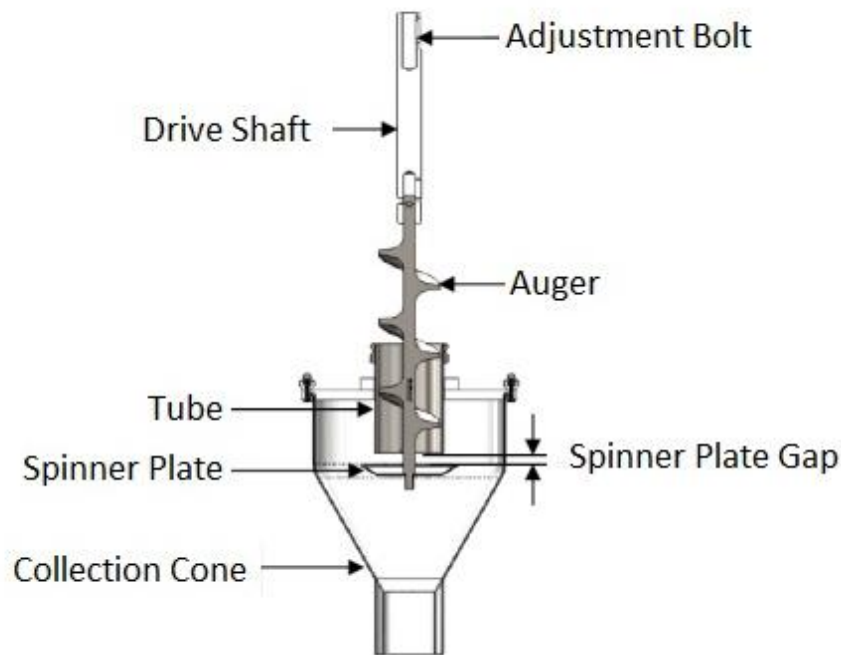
Schematic of ALLFILL auger filler tooling [5].
